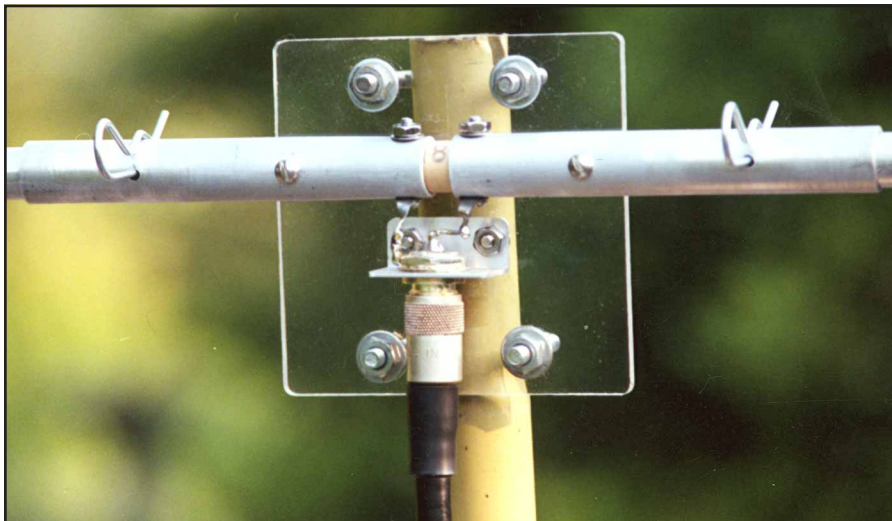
A close-up of the element mounting plate assembly, including the hitch pin clips used to secure the next section of tubing.
